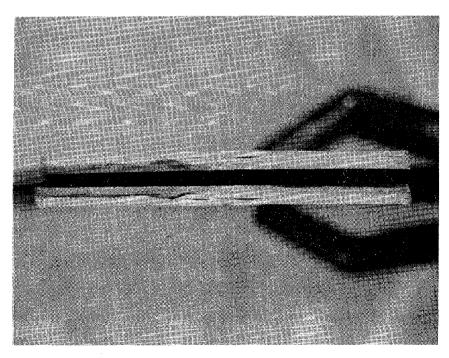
Fracture Surface of Specimen No. 353492-10A - Elox Notch at Center of Upper Edge
